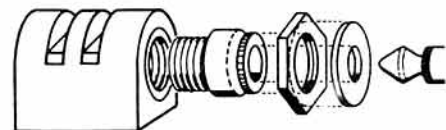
G3UI'S METHOD OF REPAIRING A BROKEN PANEL MOUNTING BUSH OF A STANDARD JACK SOCKET.
